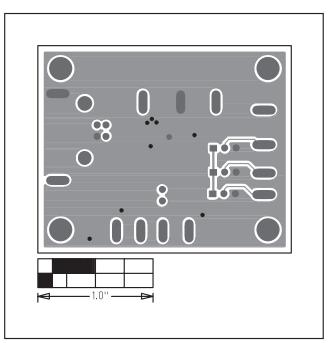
MAX8606 EV Kit PC Board Layout—Solder Side
